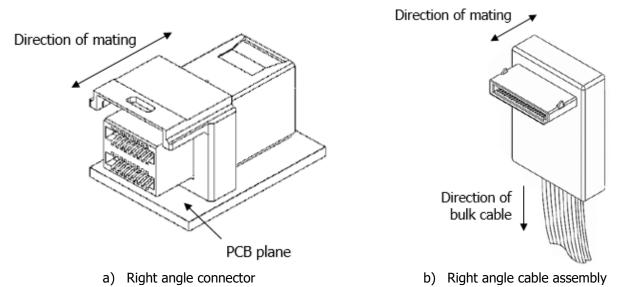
Representative Generic Right Angle Connector and Cable Assembly
